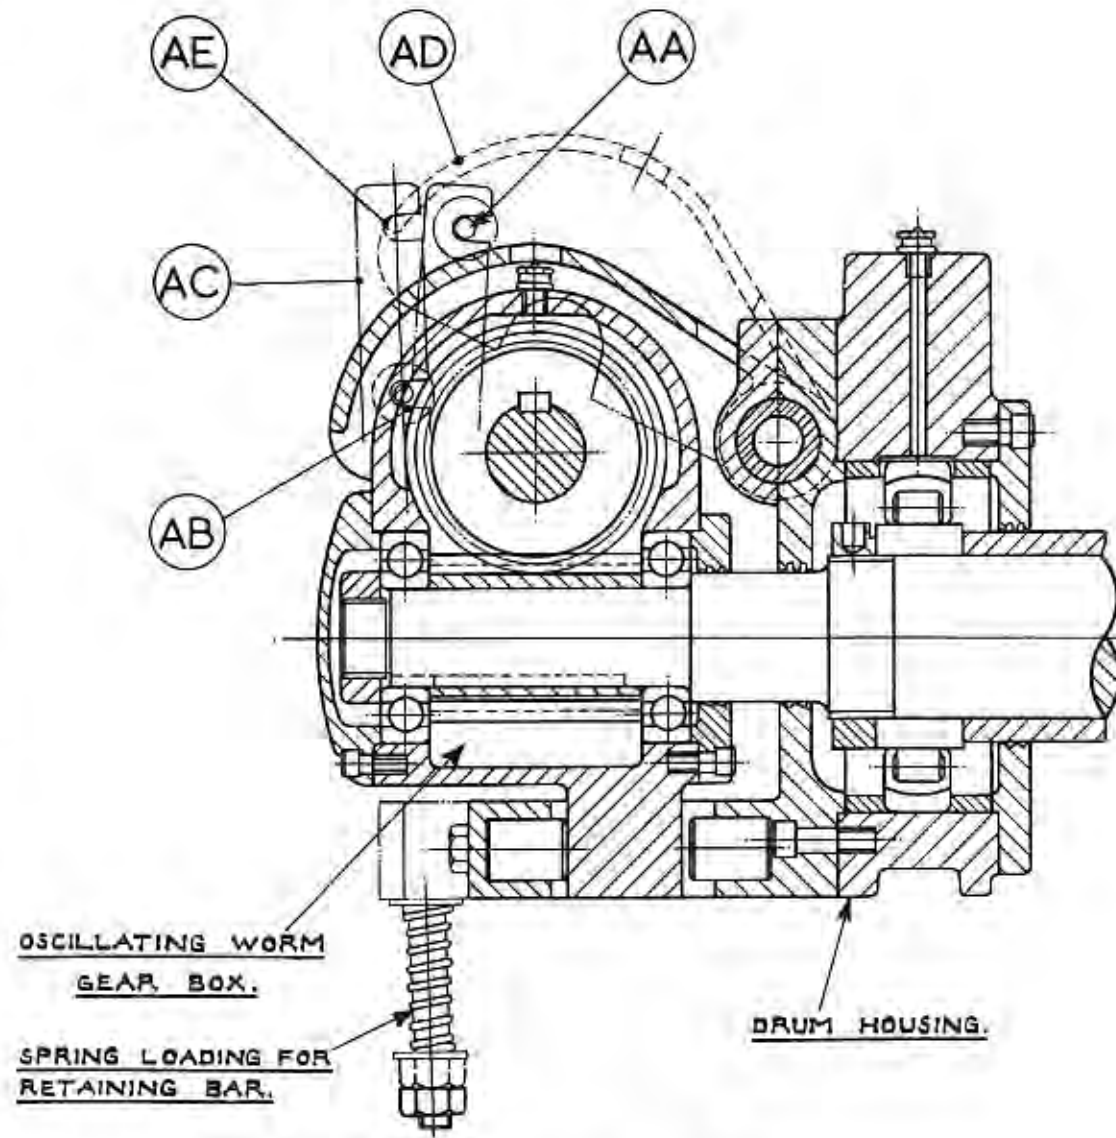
SECTION THROUGH OSCILLATING MECHANISM.
